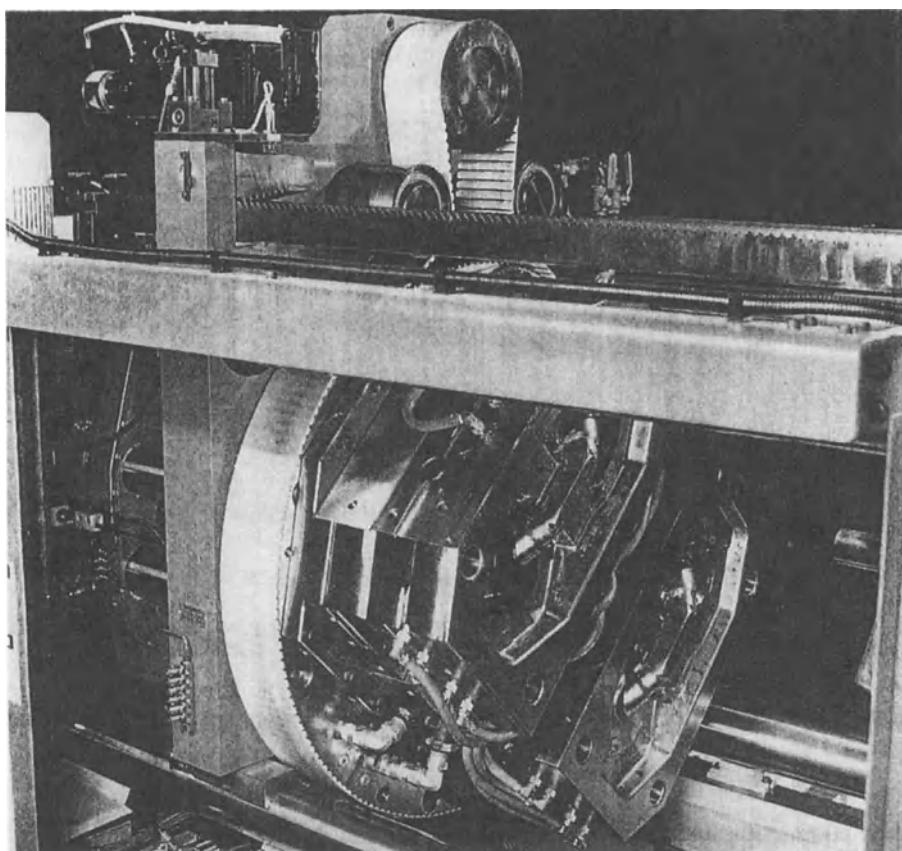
Husky's multiinjection rotary-platen machine.
